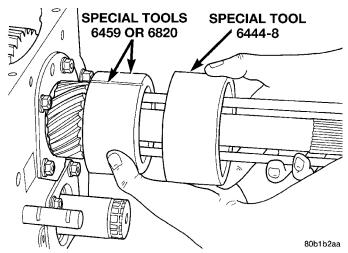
Installing Retaining Collar Over Puller Jaws
